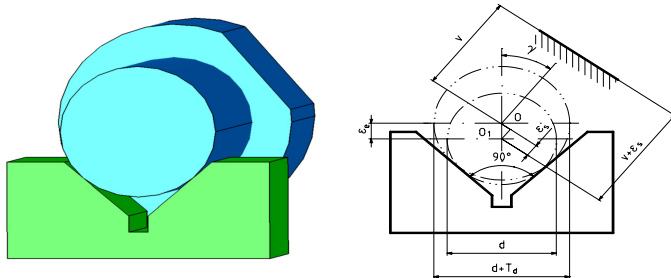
Cylindrical surface in a prismatic support the surface angle of inclination and on choice of the basic dimensional surface is shown on workpiece positioned in prism. The results are summarised in the table 1.
